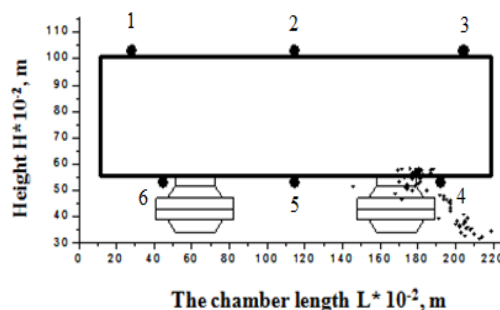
A defect detected in the lower circular weld of the gas ACA, No 4.
